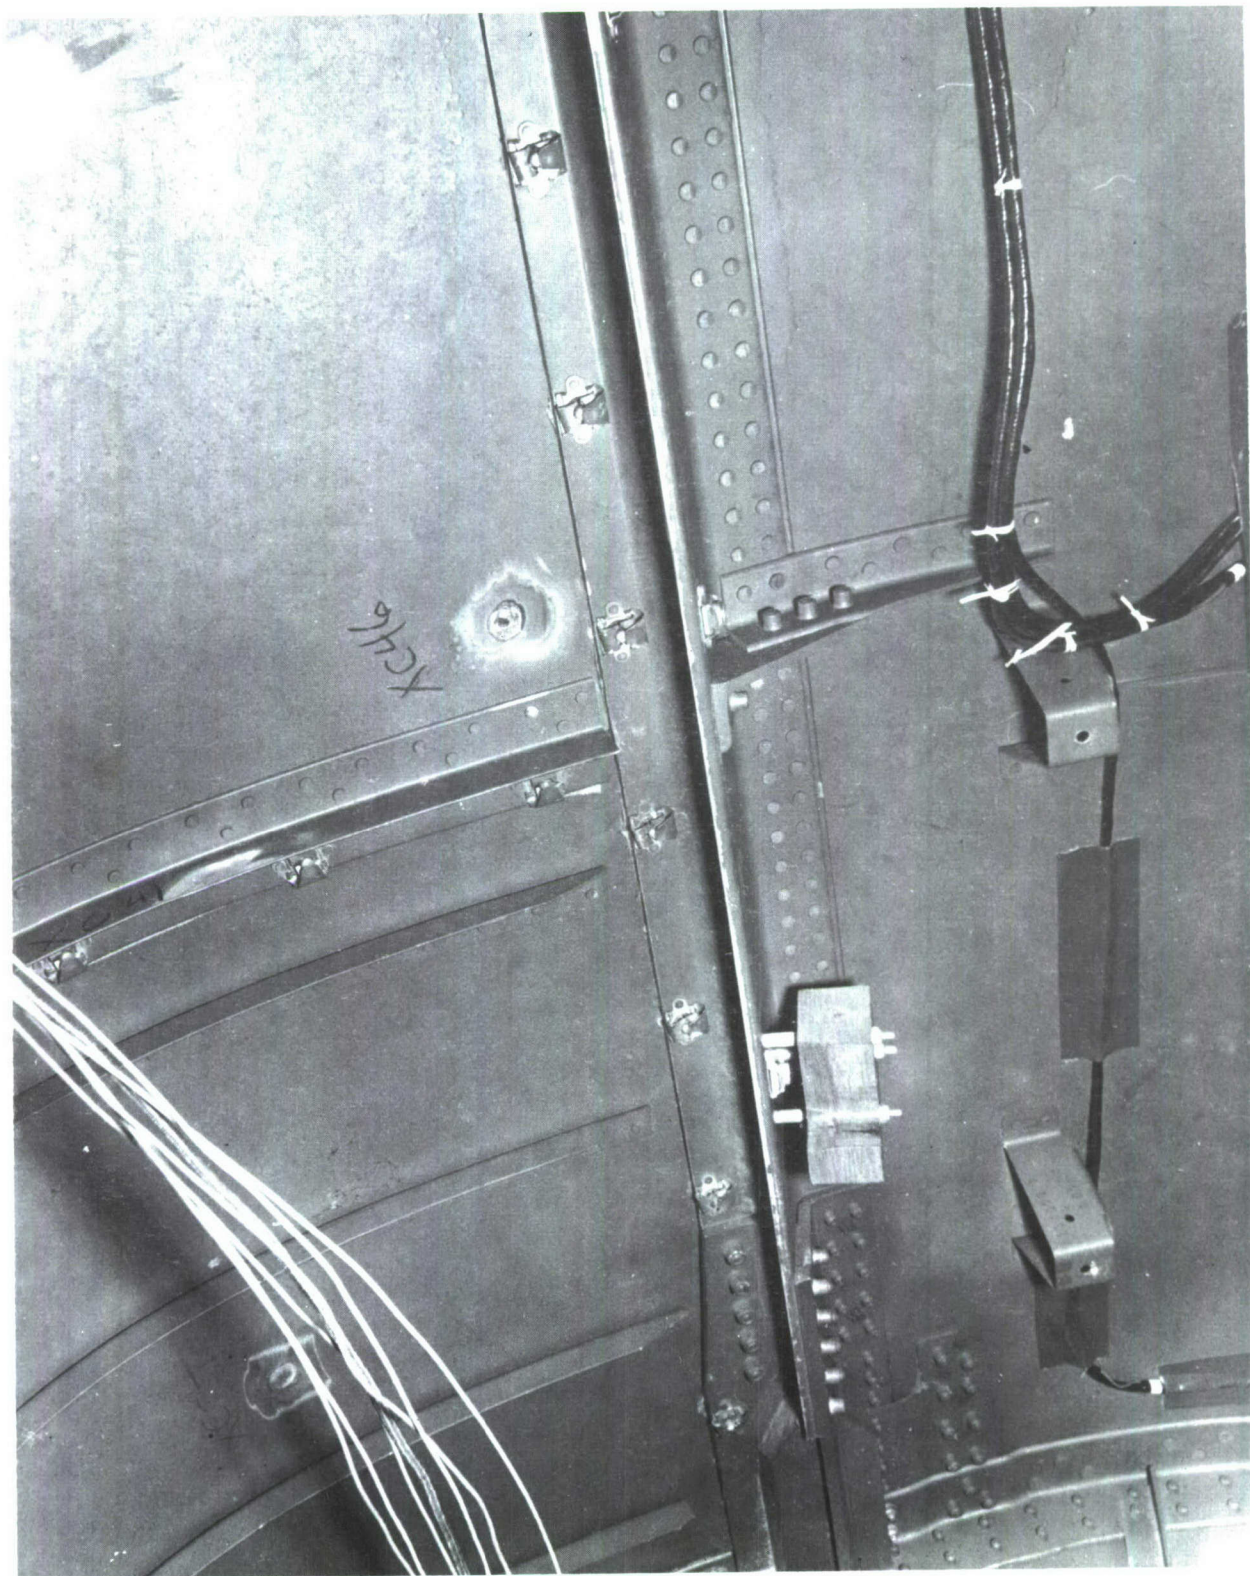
INSIDE VIEW OF L.H. SIDE OF VEHICLE EQUIPMENT BAY, F.S. 536.0-600.0
